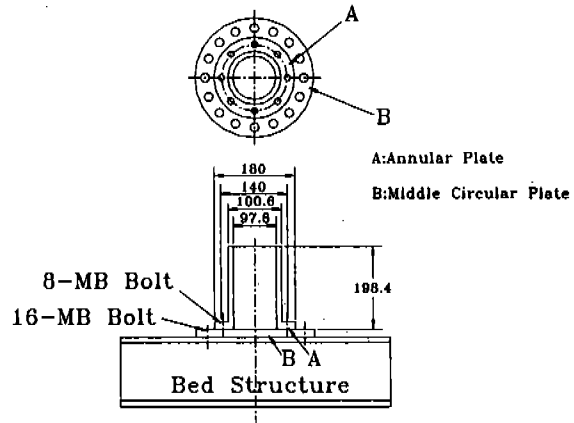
Geometry and Dimension of the Cantilevered Cylindrical Shell
